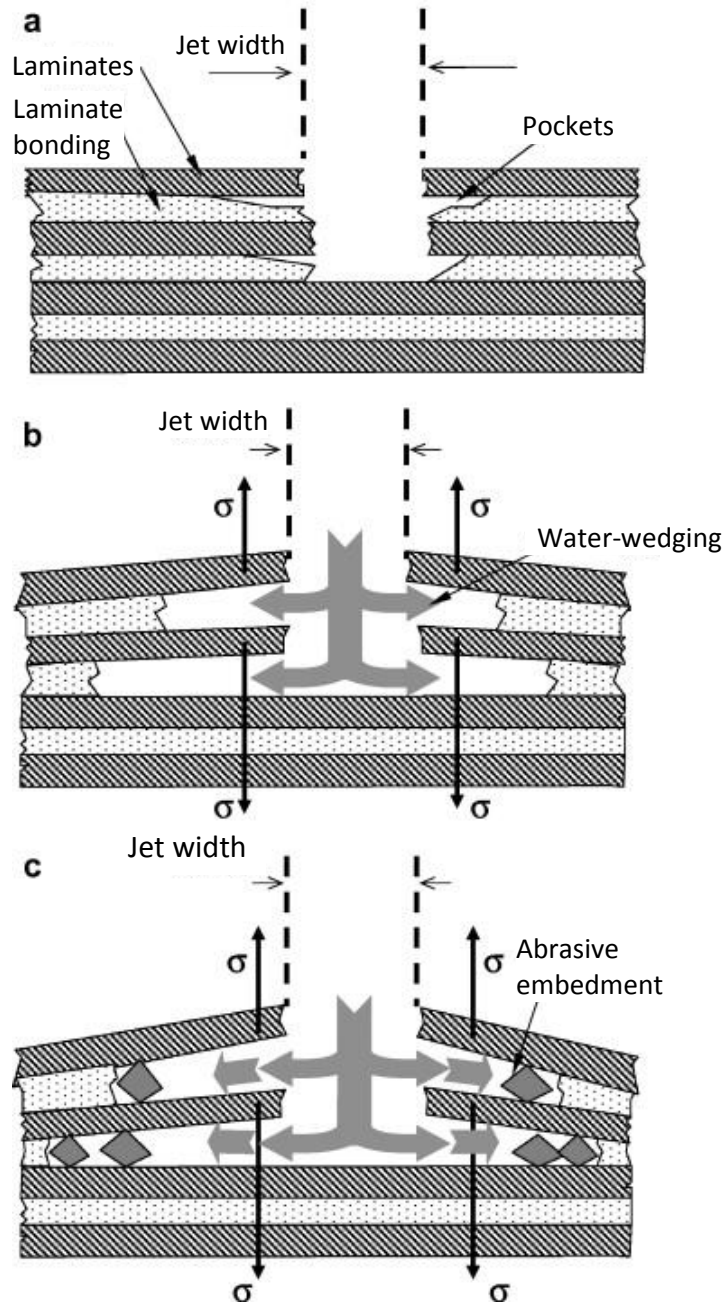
Delamination initiation in AWJ machining: (a) fracture initiation,(b) water-wedging and (c) abrasive embedment [59].
